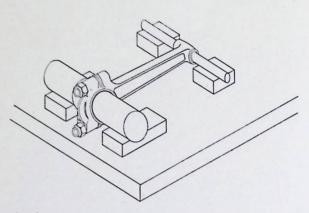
Aligning Connecting Rod. Mandrils must contact all four blocks at the same time. Adjust by twisting the shank of the rod as necessary.
